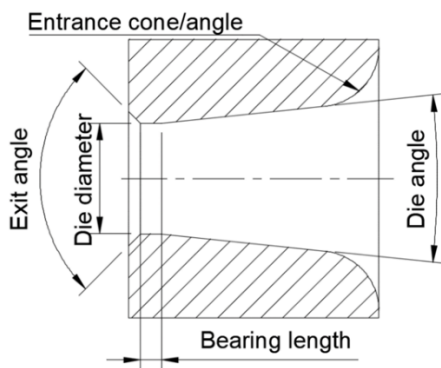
Schematic drawing die, showing the most important geometrical features.
